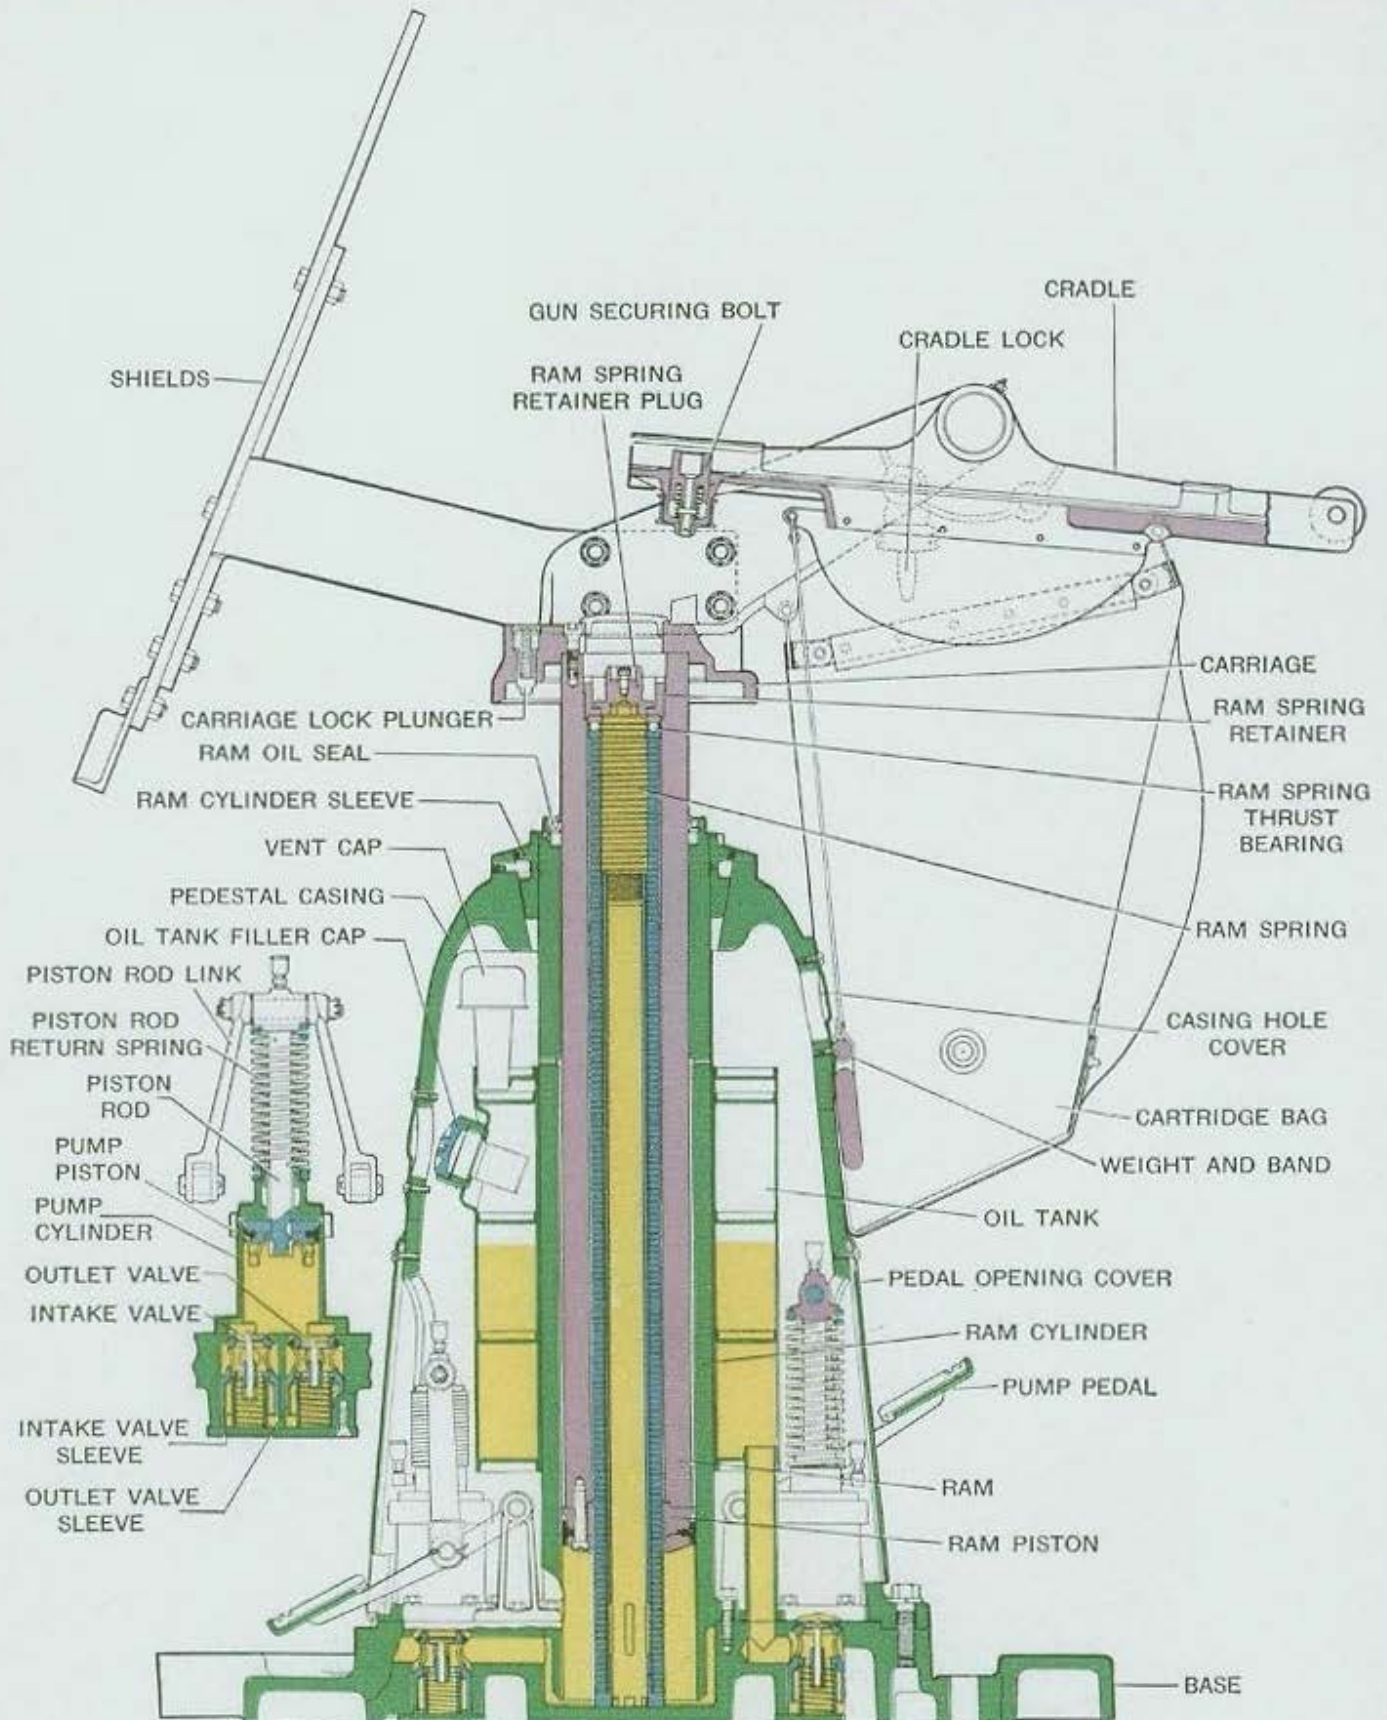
Sectional view of Mark 6 Mount (ram partially raised)
